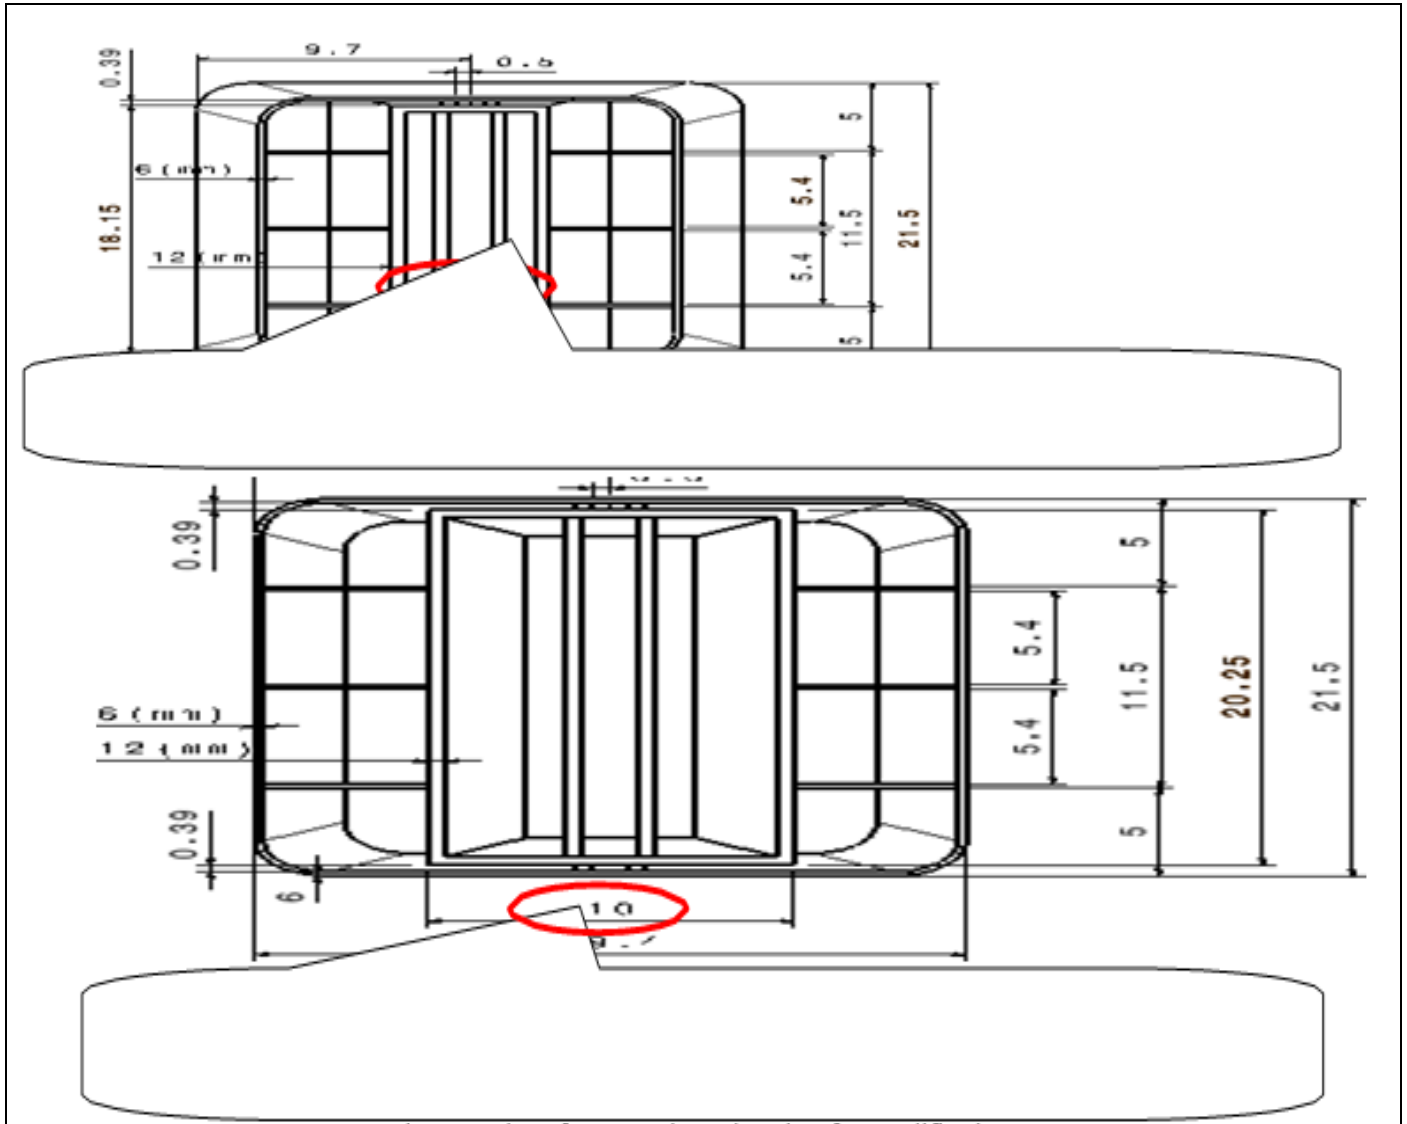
Design of PCBN Inlet and Outlet after Modifications
